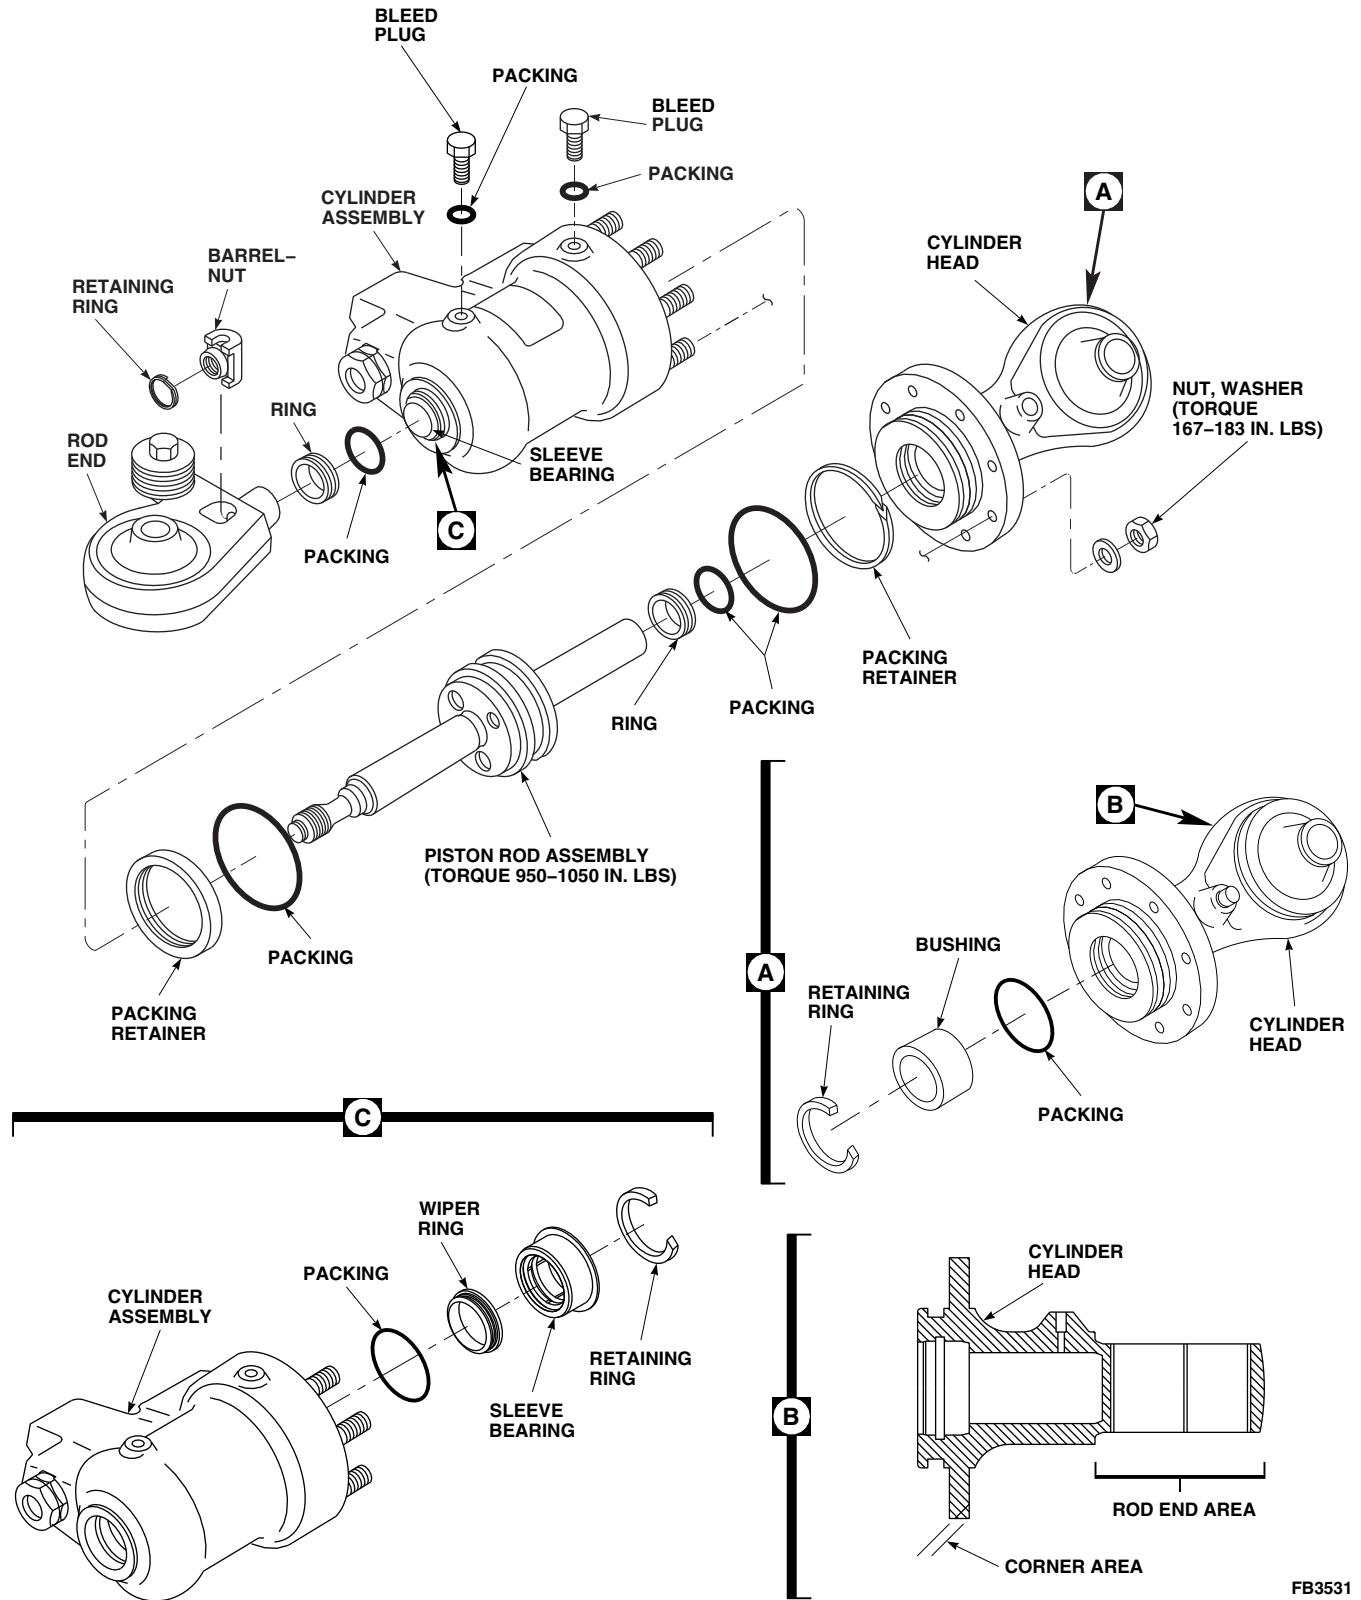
REPLACE DAMPER ROD END, CYLINDER HEAD, AND SEALS (BENCH)
